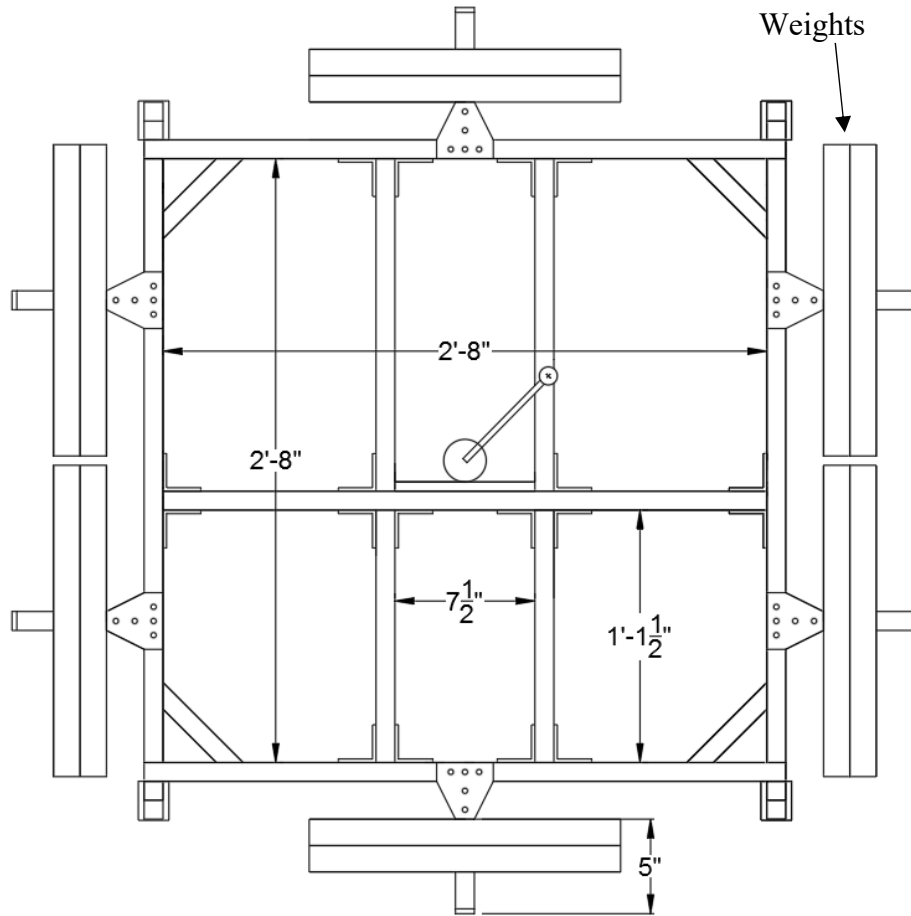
Plan view of the machine for Plane 1 shown in Figure A.2.
